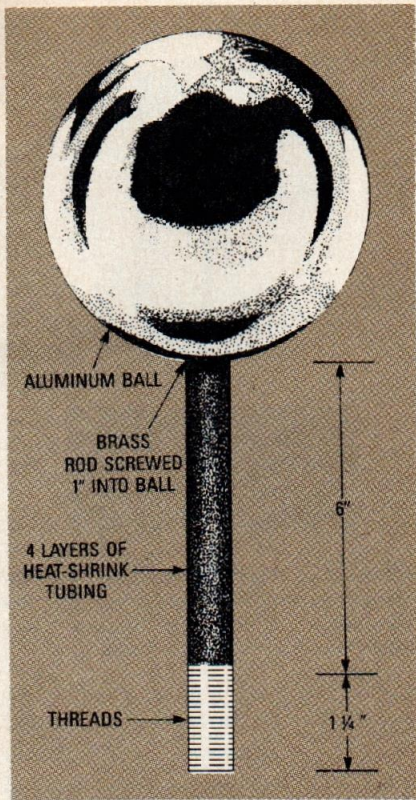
THE DISPLAY ASSEMBLY consists of an aluminum ball that is mounted on a brass rod that is threaded on both ends.
